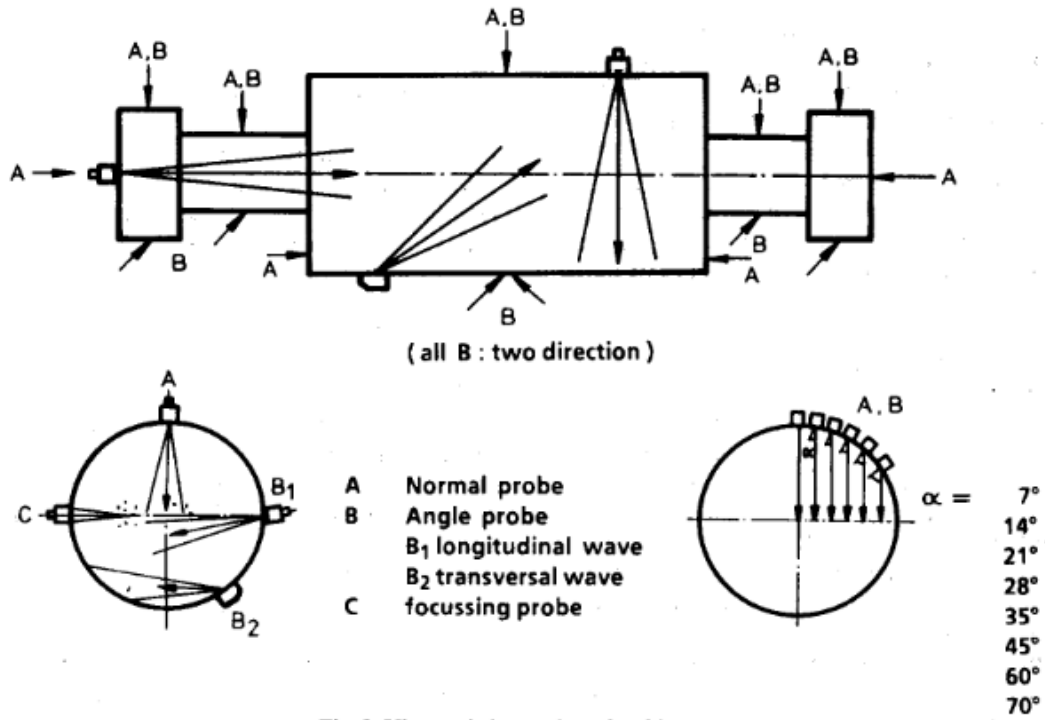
Typical ultrasonic inspection routine of rotor forgings. [Mayer et al., 1993]
